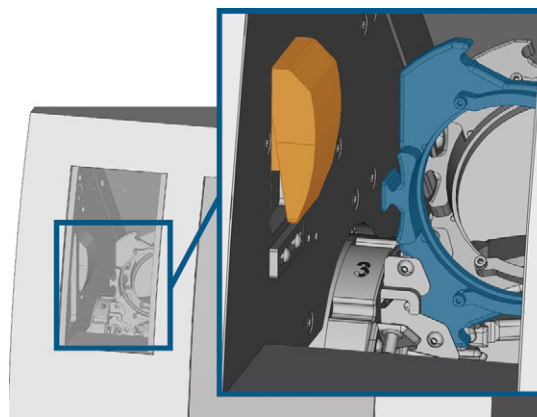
BLANK FRAME RELEASE (MARKED ORANGE) AND BLANK FRAME IN CHANGE POSITION (MARKED BLUE)
